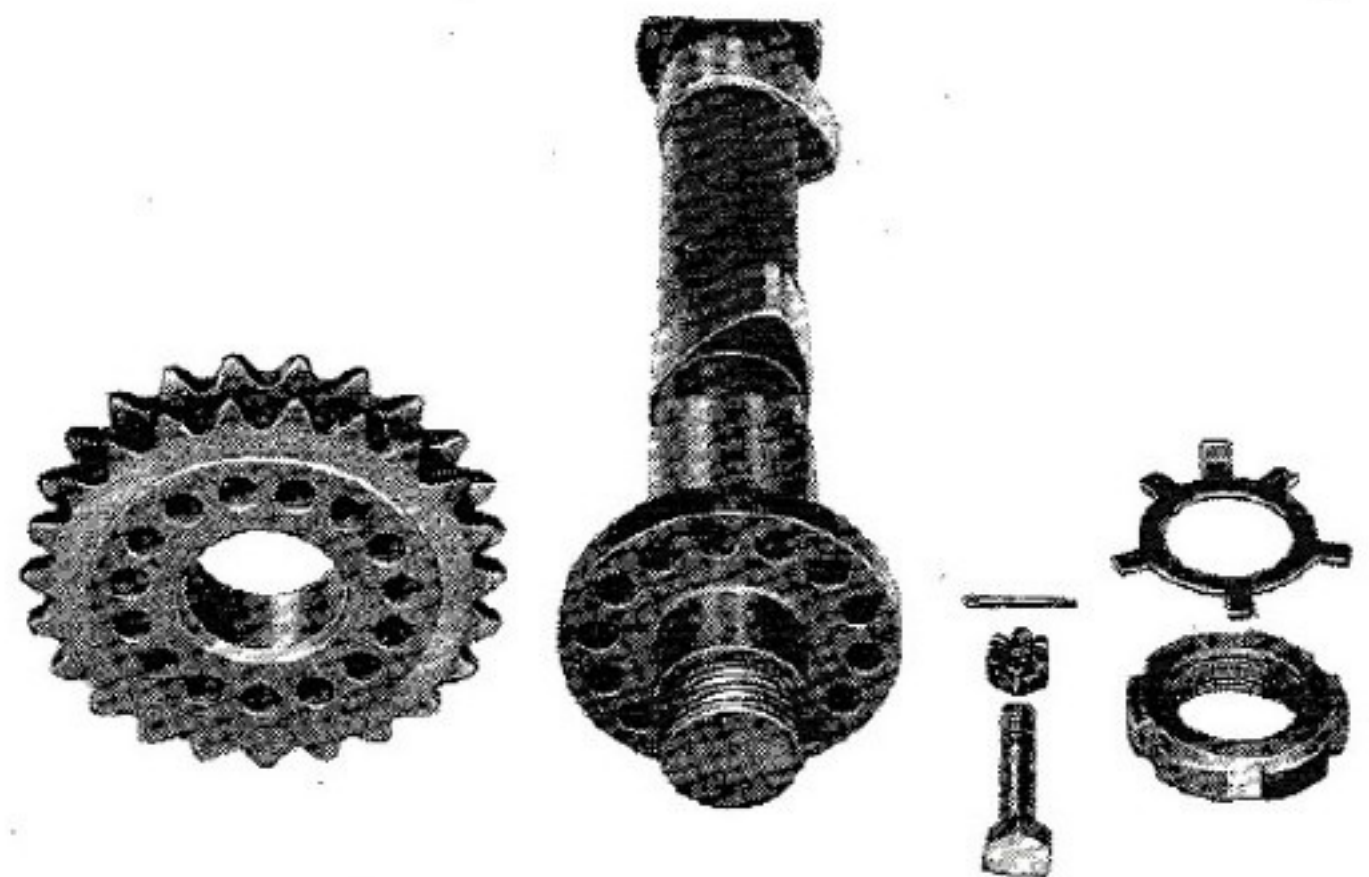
Flanged camshaft with sprocket, location screw, adjuster ring and lockplate.
